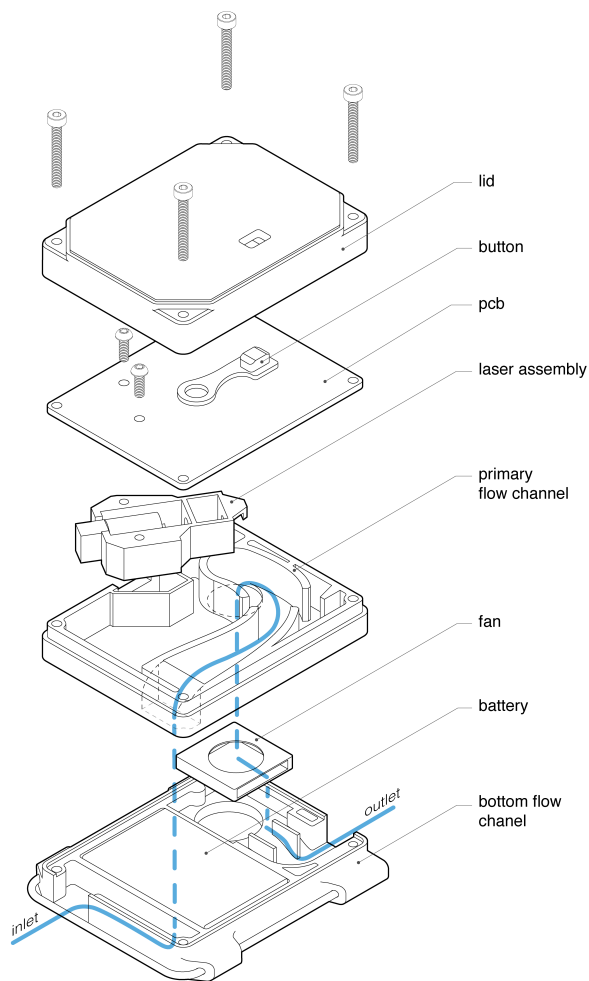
An exploded drawing of the MyPart Design detailing the air-flow and laser placement.
